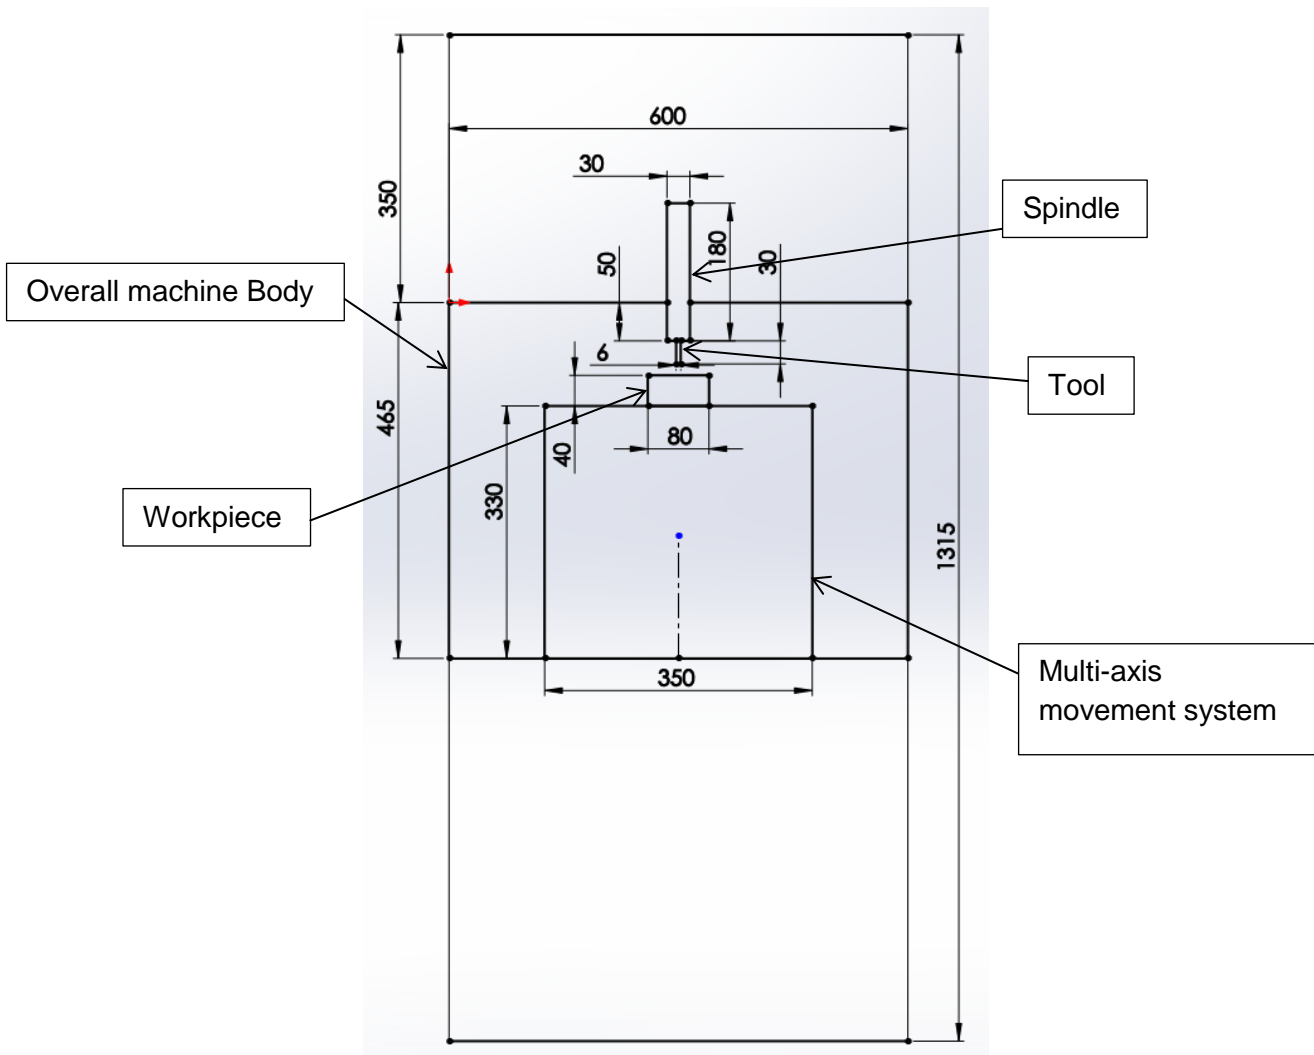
Conceptual design 3, with vertical machine alignment. The multi-axis movement system holds the workpiece.
